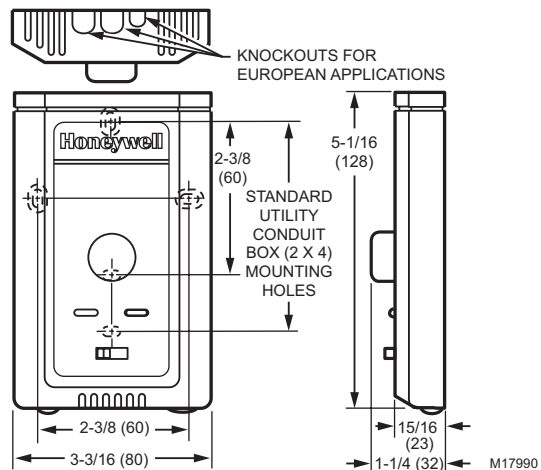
T7770A,B,C,D,E,F,G Subbase dimensions in in. (mm).
